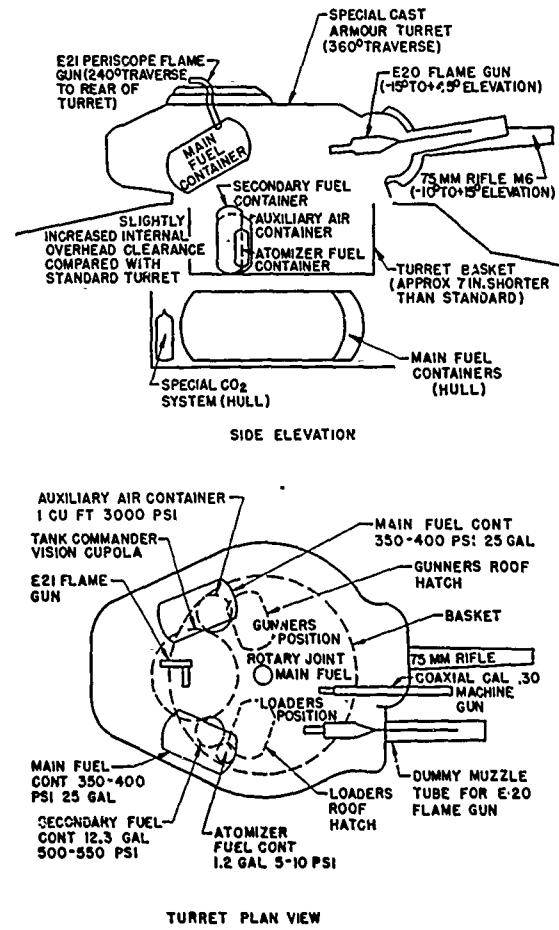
Flame-thrower tank T-33 (E20-20) in M4A3E2 medium tank showing schematic lay-out of turret.
